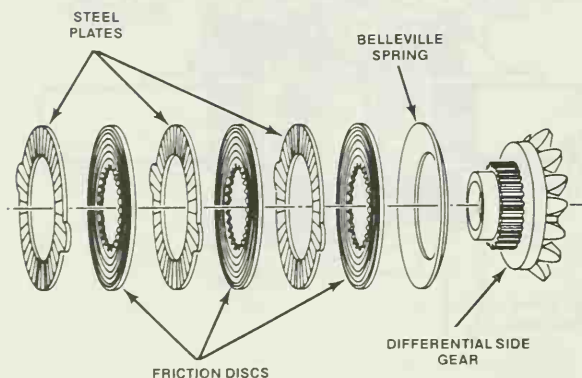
A clutch pack with a Belleville spring. (American Motors Corporation)
